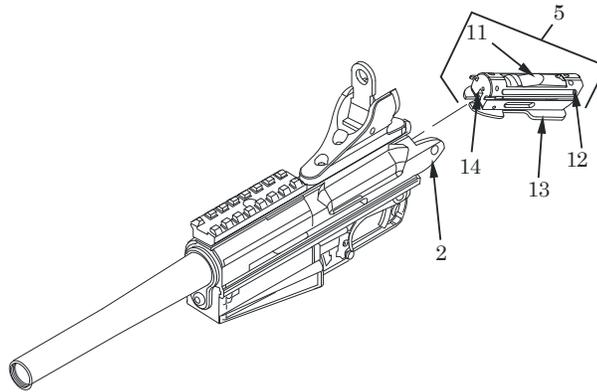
Installation of Bolt/Bolt Carrier Assembly.
